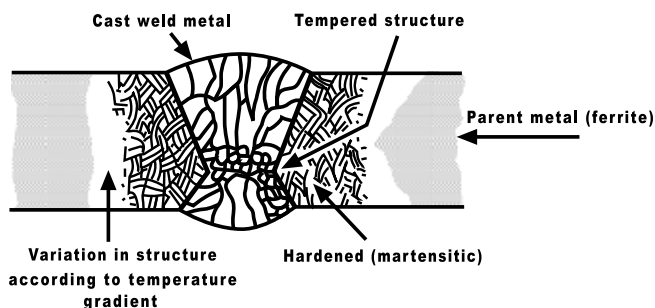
Typical welding structure of martensitic Stainless Steels
